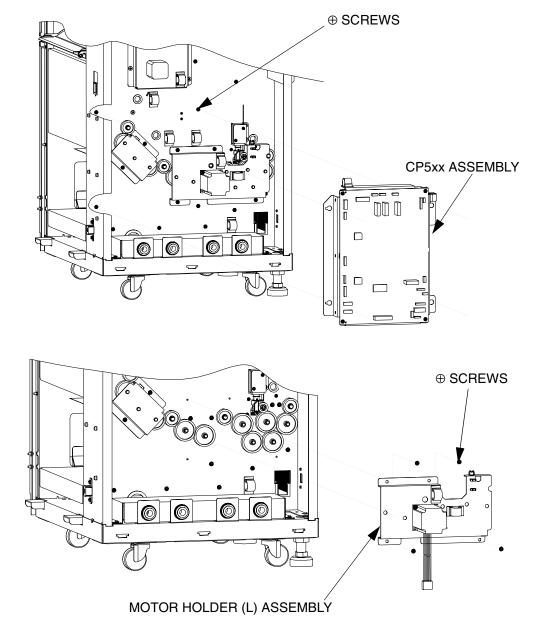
Removal of the Relay Unit Feed Motor 4
